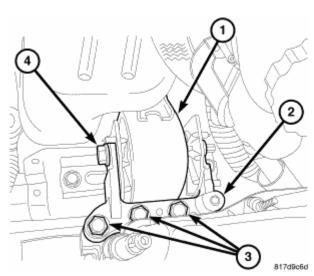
RIGHT ENGINE MOUNT Courtesy of CHRYSLER LLC
